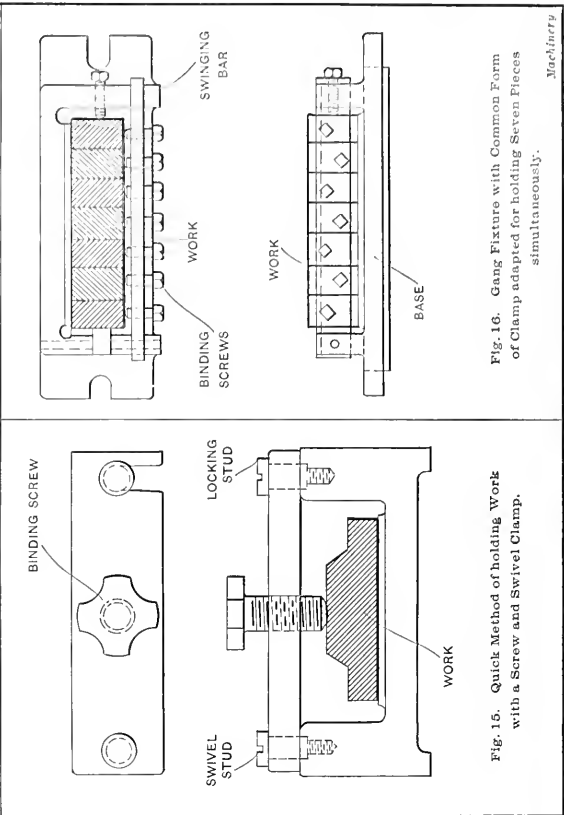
Gang Fixture with Common Form of Clamp adapted for holding Seven Pieces simultaneously.
